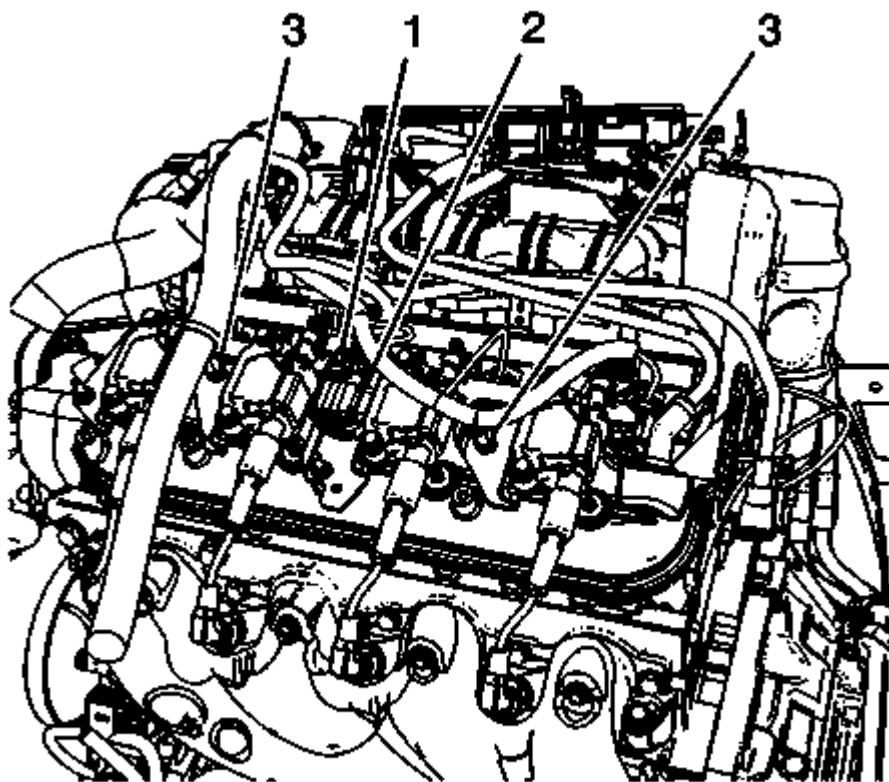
Connector Position Assurance (CPA) Retainer, Connector And Clips
